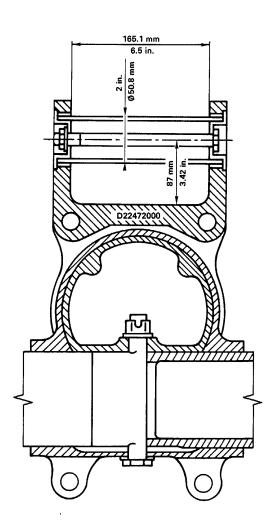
Sheet 1 Figure 003. Nose Gear Tow Fittings (Sheet 1)
